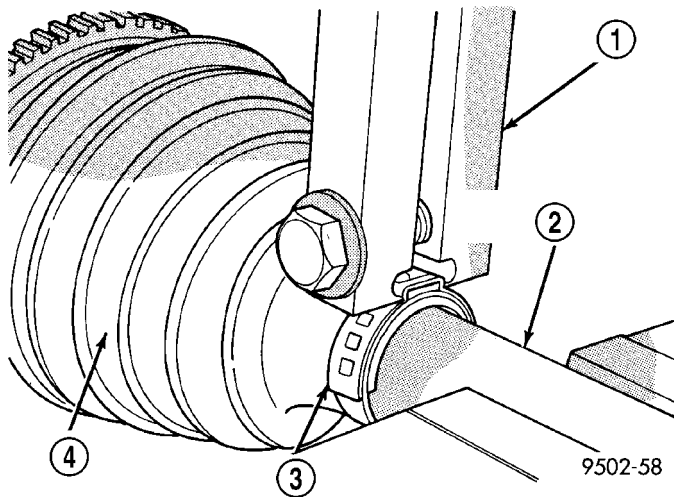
Crimping Tool Installed on Sealing Boot Clamp
